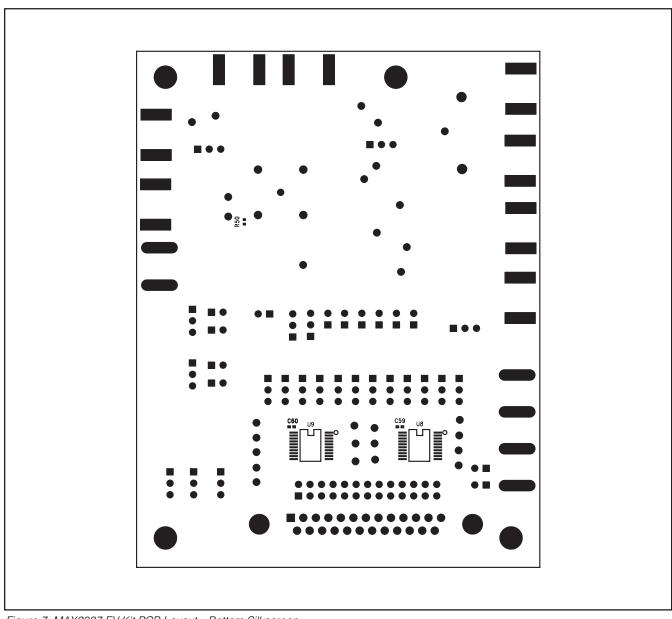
MAX2837 EV Kit PCB Layout—Bottom Silkscreen
